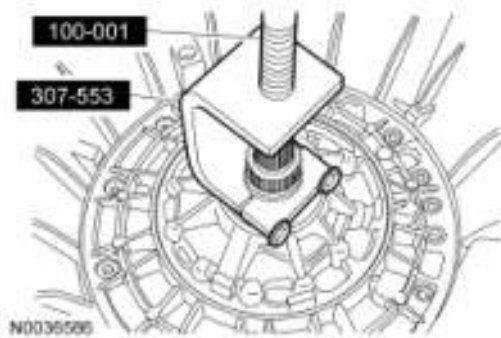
Removing Front Pump Support Using Special Tools (100-001, 307-553)
